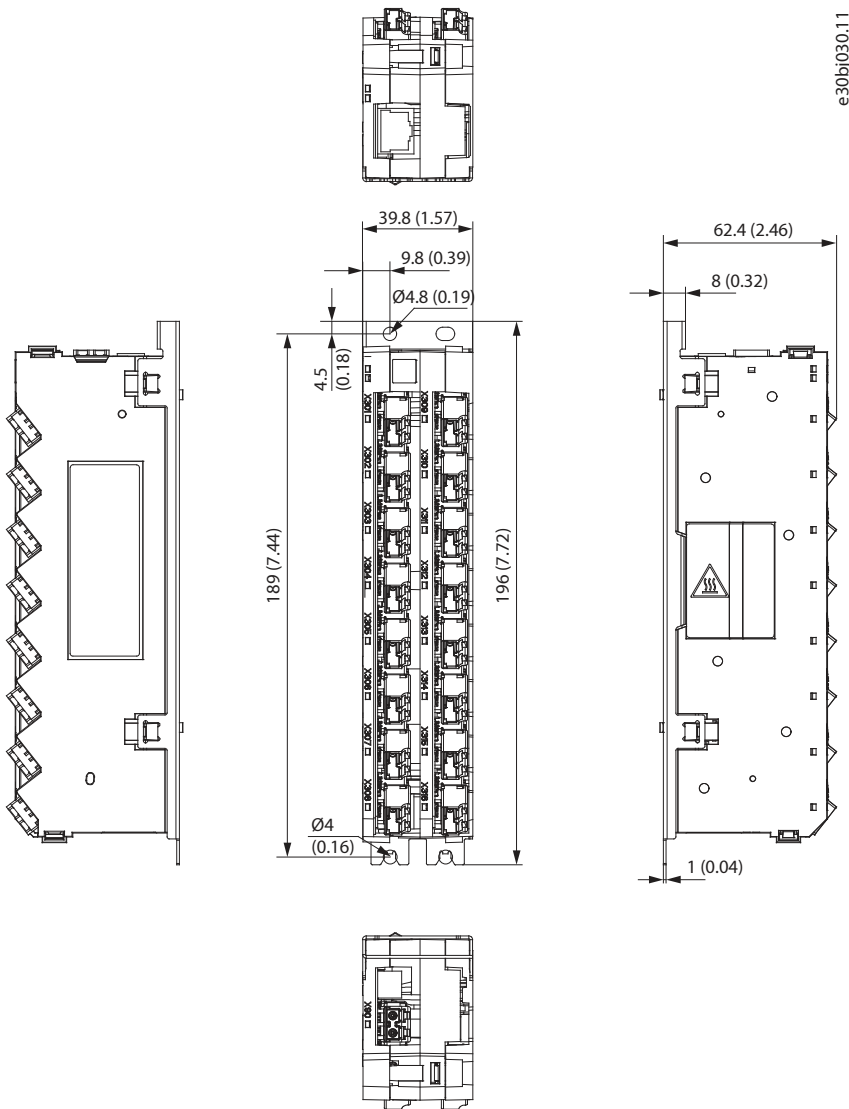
Dimensions of the 16-port Star Coupler Board in mm (in)
